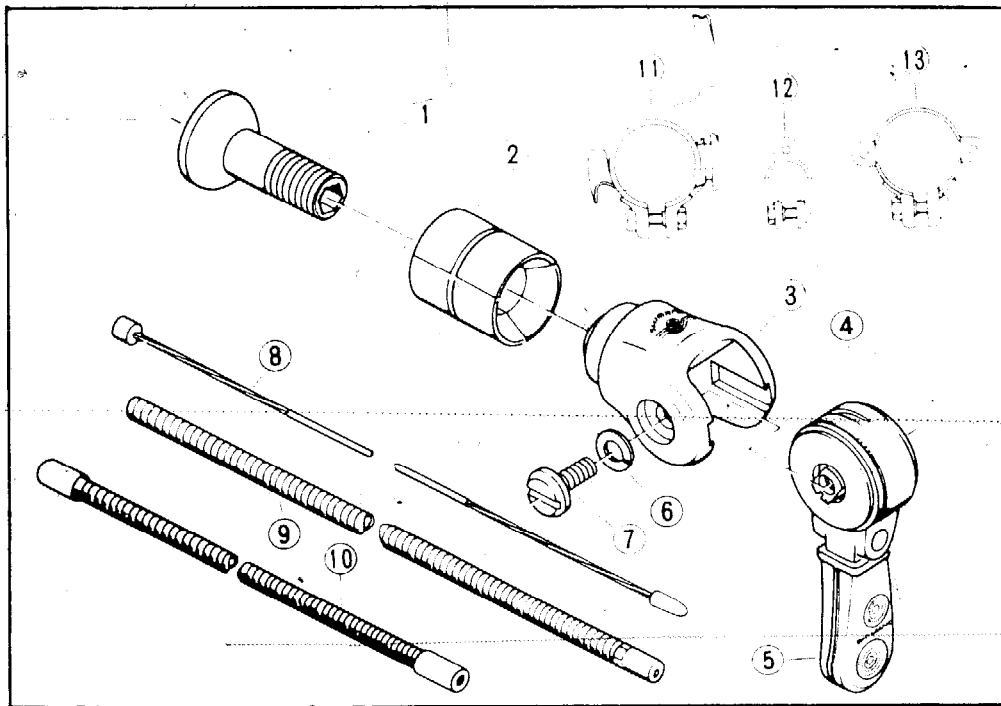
Shimano Model LD-500 bar-end control shifting lever. Parts are: (1) anchor bolt, (2) segment assembly with spring, (3) body, (4) lever assembly with lever cap, (5) lever cap, (6) spring washer, (7) lever fixing bolt, (8) inner cable, (9) lever end outer casing, (10) outer casing, (11) cable guide, (12) outer stopper and (13) outer stopper.
